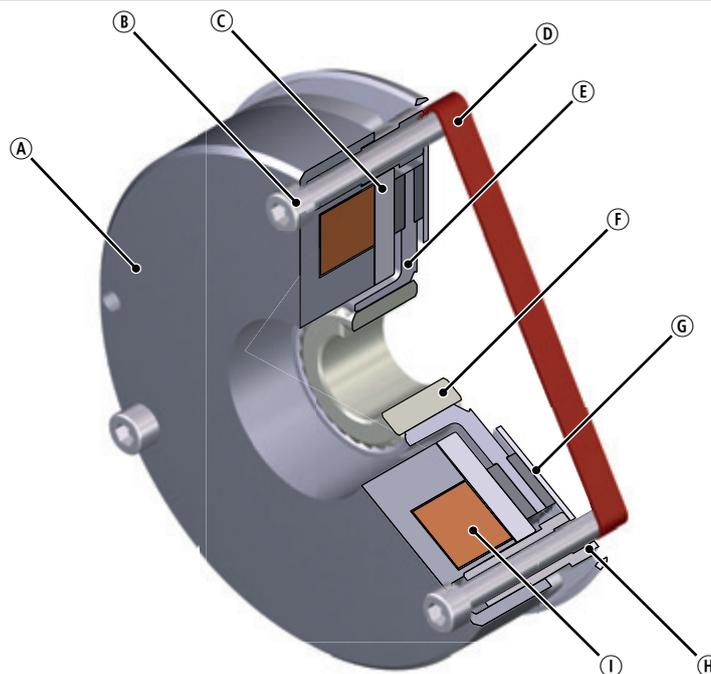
Design of a INTORQ spring-applied brake BFK557-06 to 12: Complete stator + rotor + friction plate
